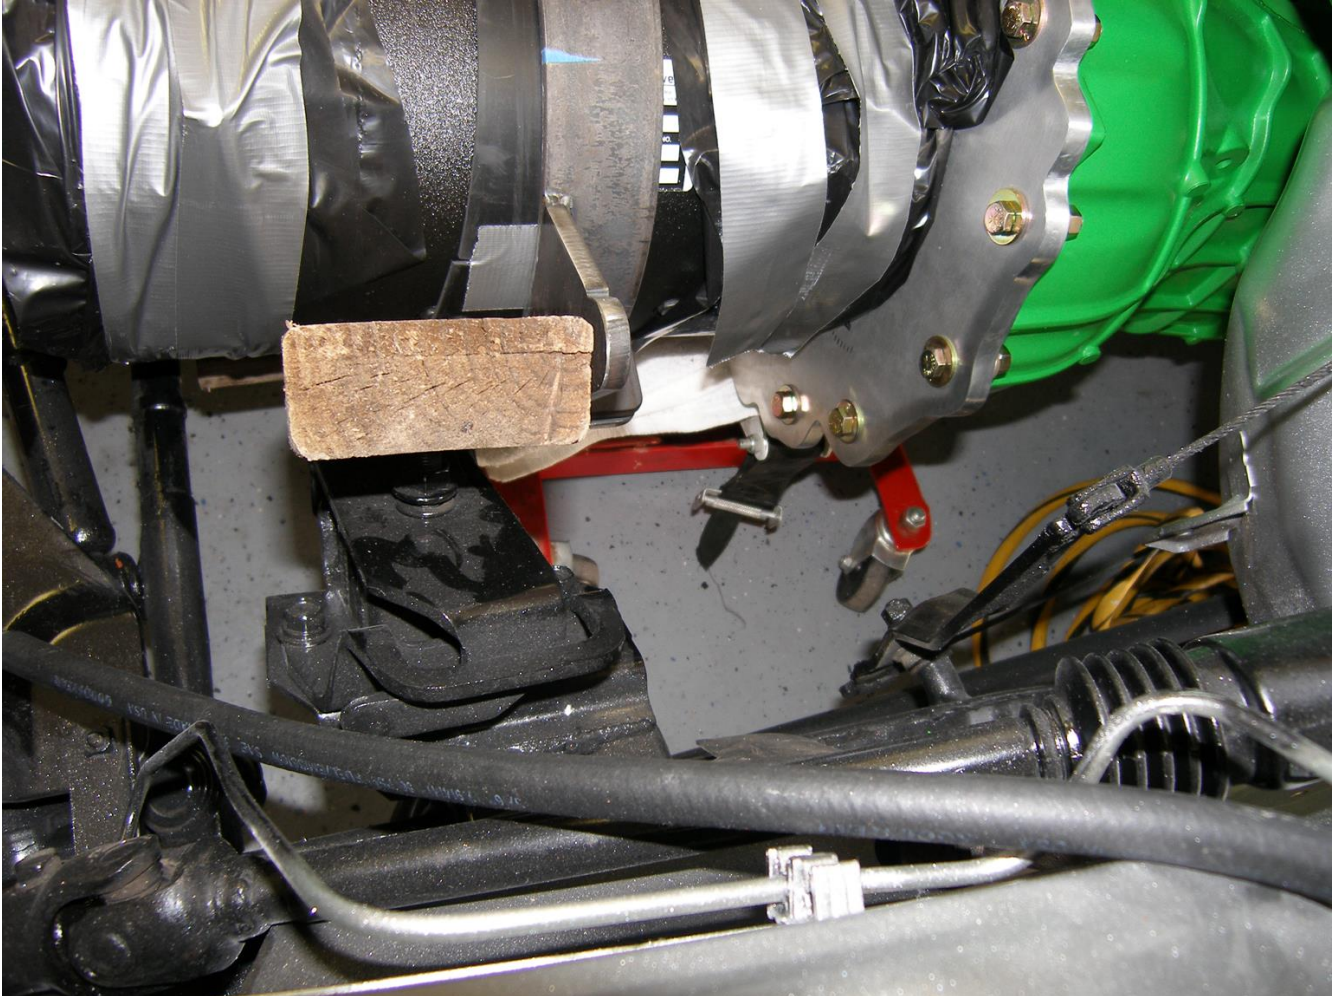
1 One of the stock (flexible) Isuzu motor mounts beneath the wooden board.
